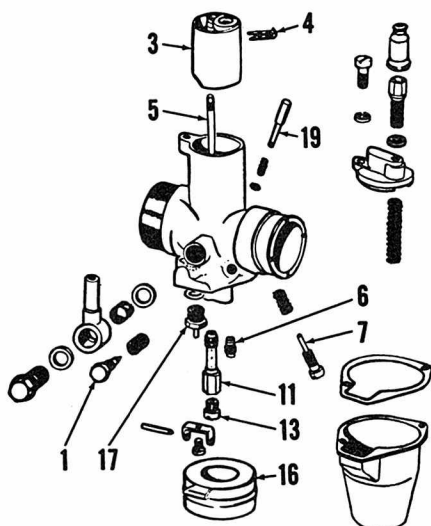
View of IRZ single needle carburetor. Refer to Fig. M2 for legend.
